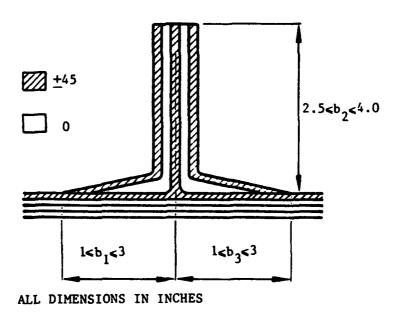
Typical Stiffener Dimensions for Initial Sizing.
